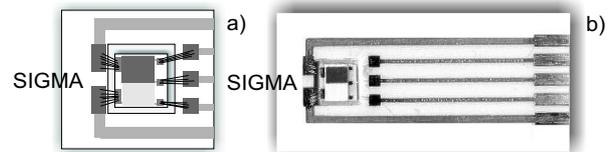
Detail of the sensor assembly (a) and a carrier frame based on LTCC (b) with the gas sensor unit.
